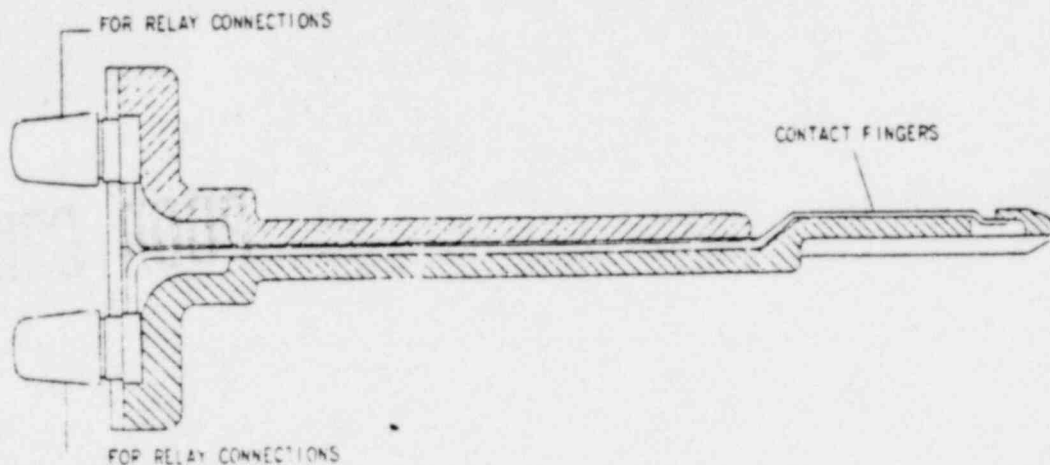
Sectional View of XLA13A Test Plug Showing Internal Wiring
